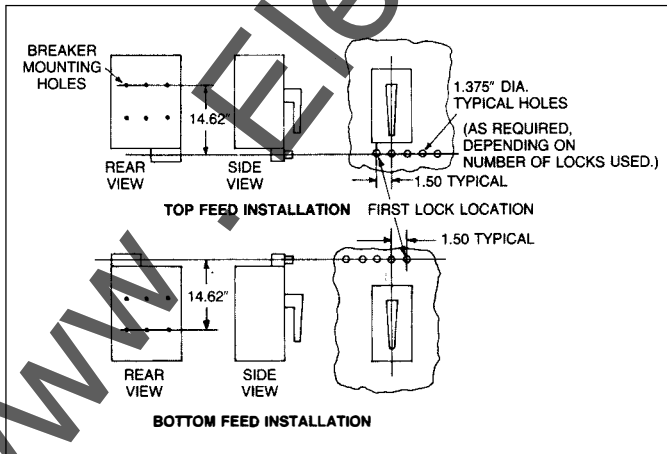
Recommended Panel Cut-out — 2500-4000A Breakers
